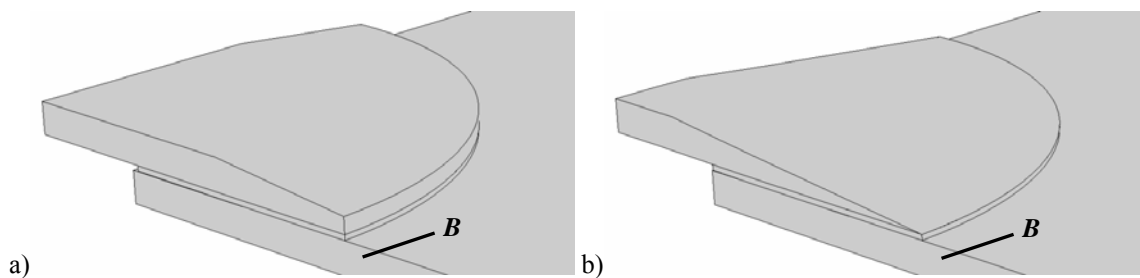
Deformed shape of the 0.6 mm (a) and 1.2 mm (b) patch outer chamfer repairs (compressive load).
